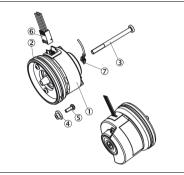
Assembly figure of SRS50S/SRM50S, conical shaft, resolver support
